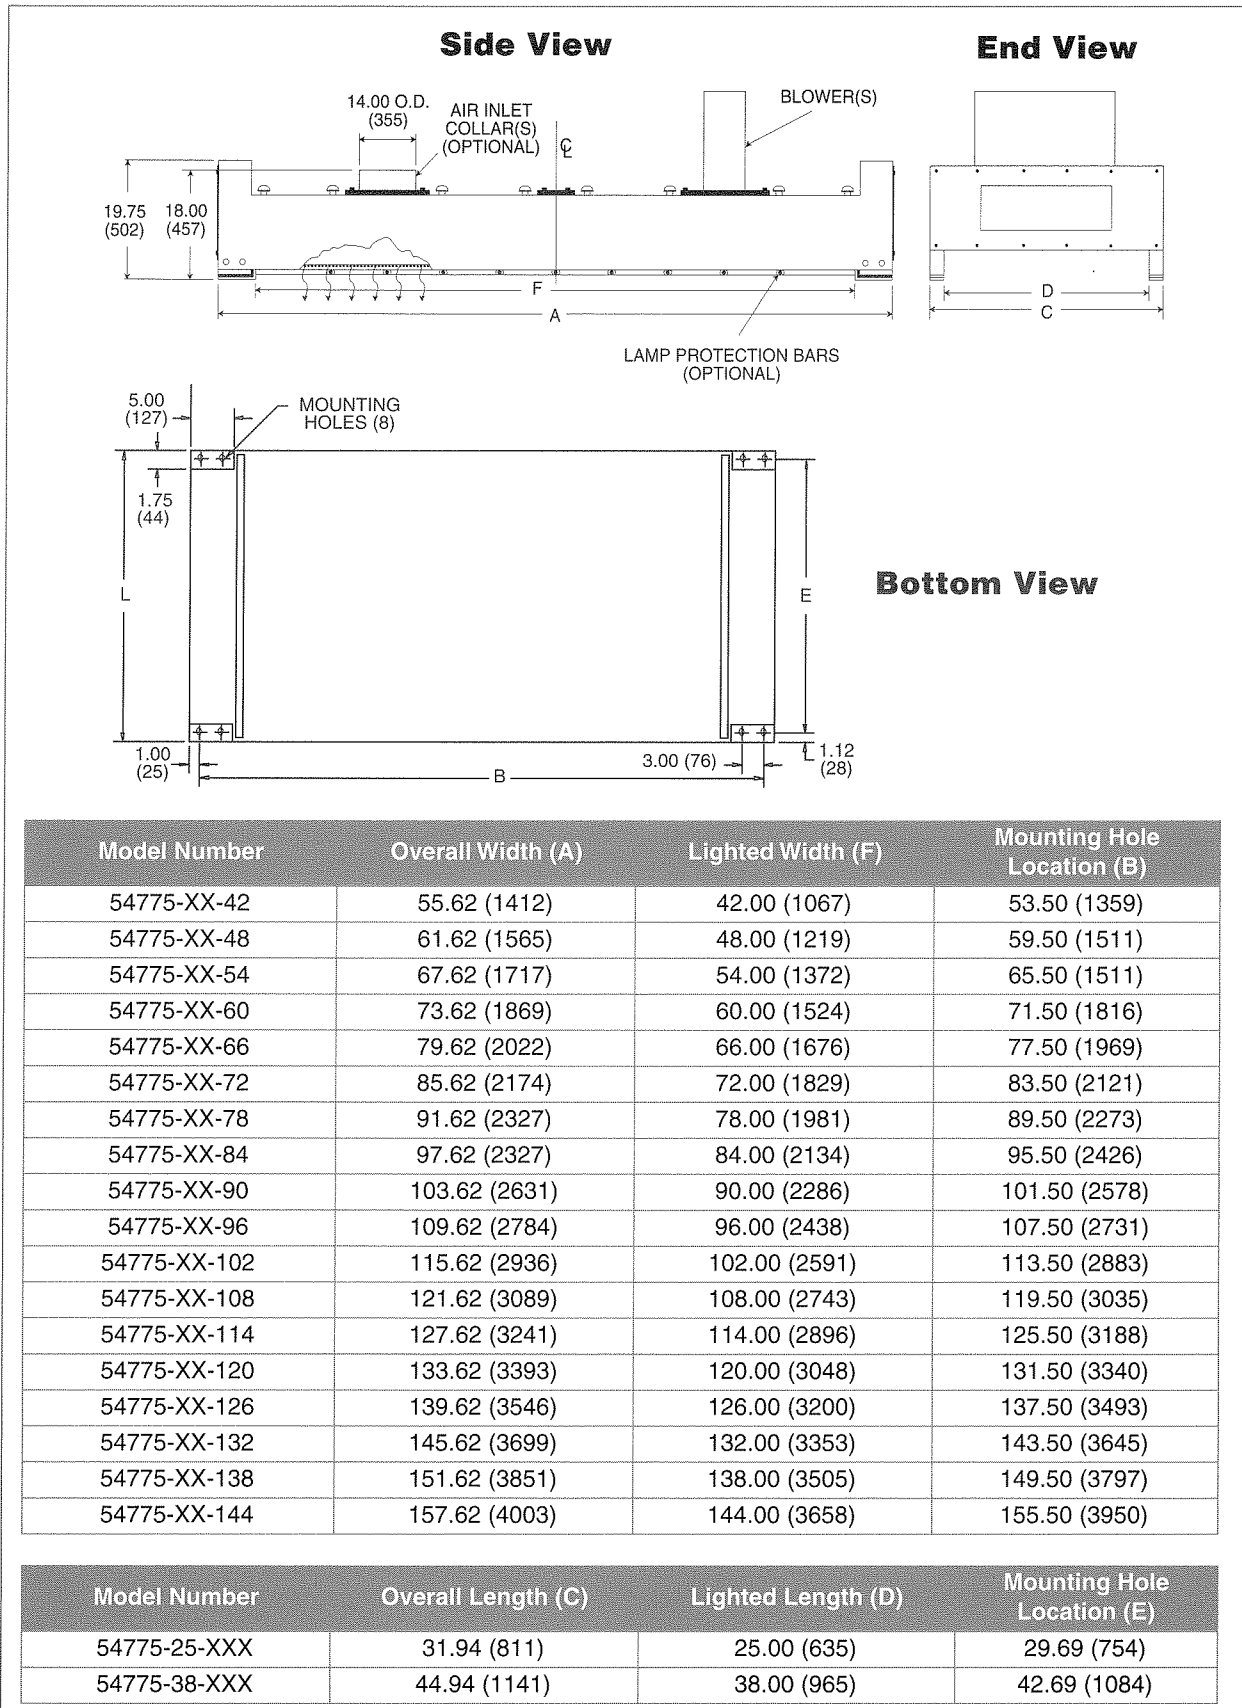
Model 54775 Dimensions [All dimensions in inches (mm)]
